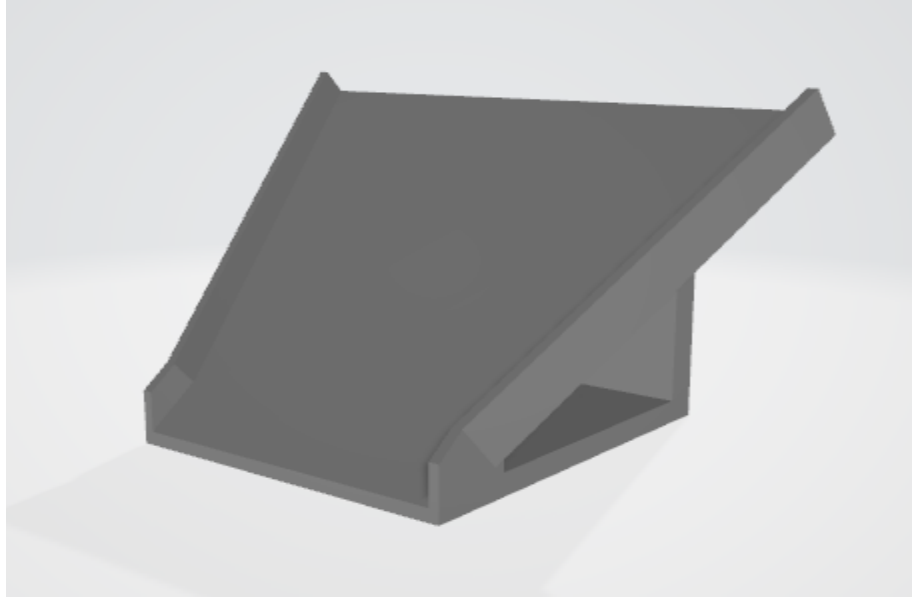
3D Printed Stepper Motor Angled Platform (SRP)
